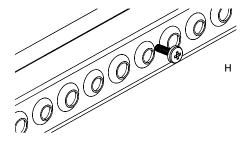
Adjustment of the nozzles L, M and H (The throttling strip by nozzle H has been removed.)
